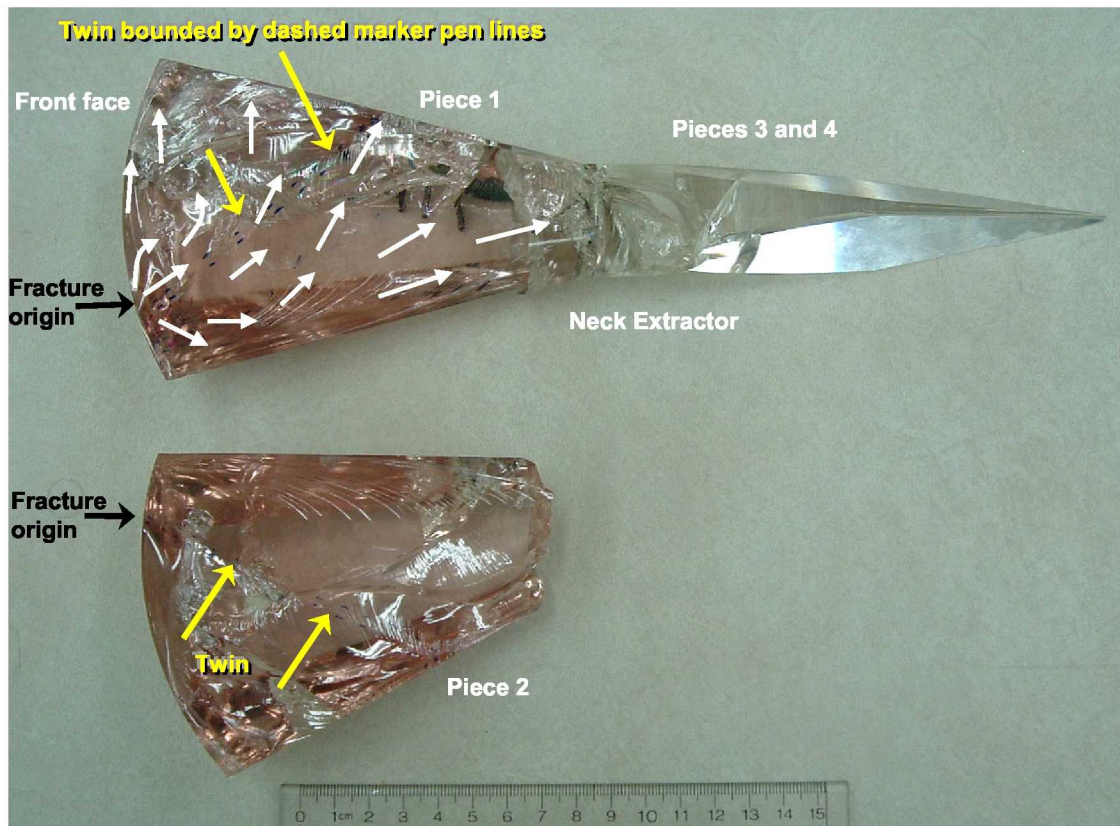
Concentrator RSC no. 1 fractographic analysis. Fracture started from the fracture origin on the front face and propagated (white arrows) into the cone body and onwards to the neck and extractor. The initial main fracture was almost perfectly radial and close to the m -plane in orientation. All the cracking in the neck and cone body can be backtracked to the one fracture origin. An incidental twin ran entirely through piece 1 from the lens front face through to the cone side and out the back of the cone. One end was close to but not exactly at the fracture origin site (2.3 mm away). There were minor perturbations in the main crack when it reached the twin plane indicating that the twin was in the RSC before the crack ran through it. The twin was very shallow in piece 2. It ran from the lens face right through the side of the cone, but did not extend very far below the fractured surface. The insert shows how subsequent handling caused the extractor to split into two pieces that separated from the cone body.
